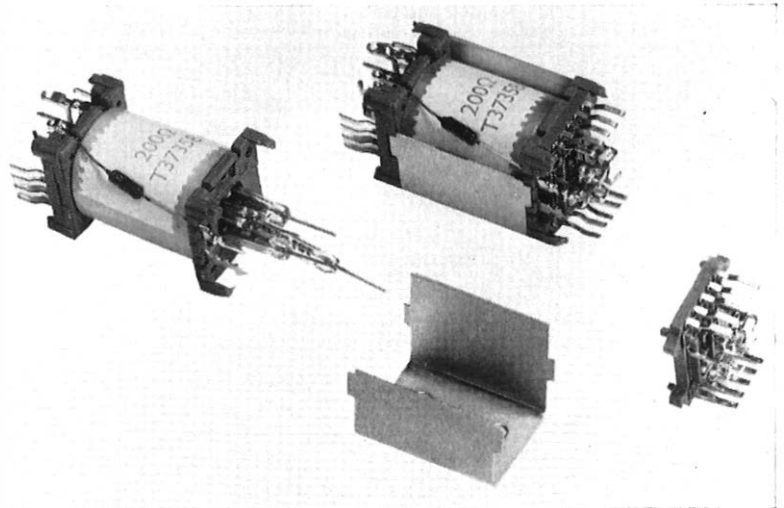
PARTS OF A CROSS-POINT REED RELAY
